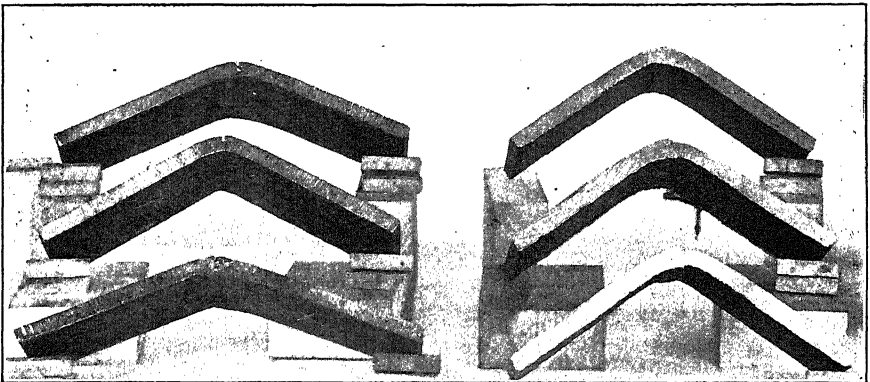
GAS AND ELECTRIC BENT SAMPLES. GAS WELDS AT LEFT AND ELECTRIC WELDS AT RIGHT.
